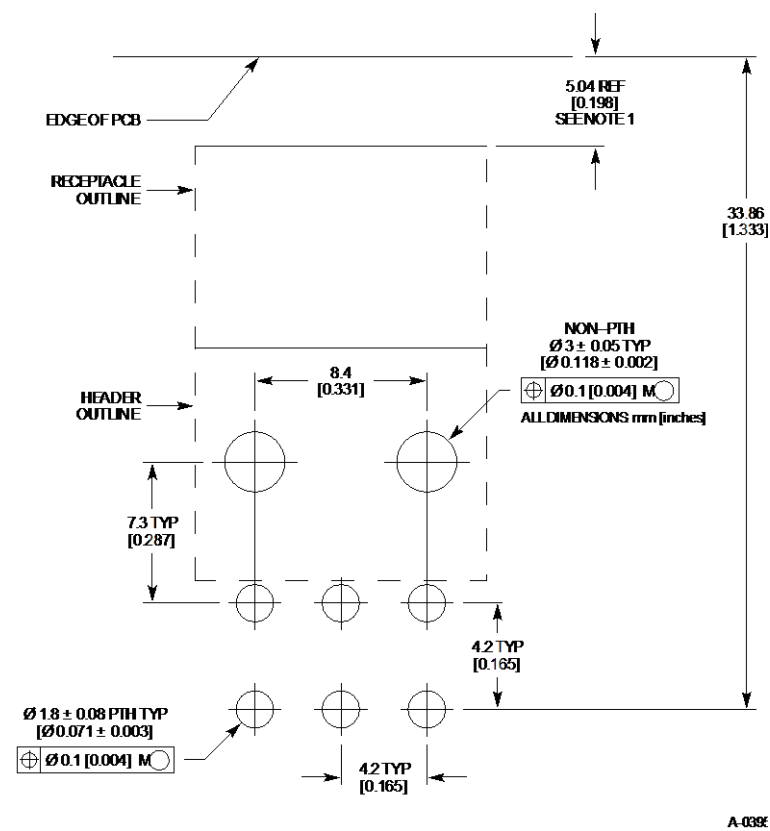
6-Position R/A Thru-Hole Header Recommended PCB Footprint
